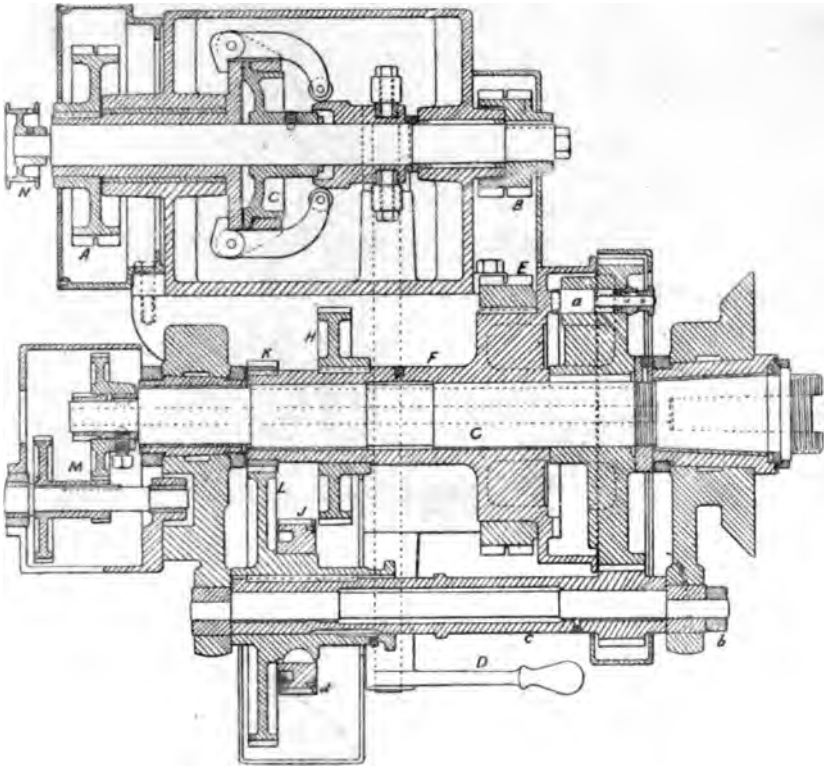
Section through Feed and Spindle Gears of Cincinnati Machine.
